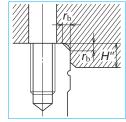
Shoulder for the Fig. 6 Shoulder for the ball slide datum surface
